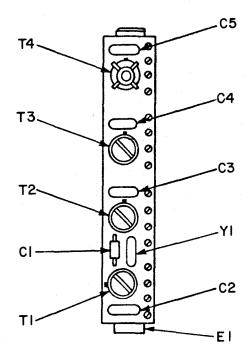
20 MHz Subassembly A2A4A10, Component Locations
